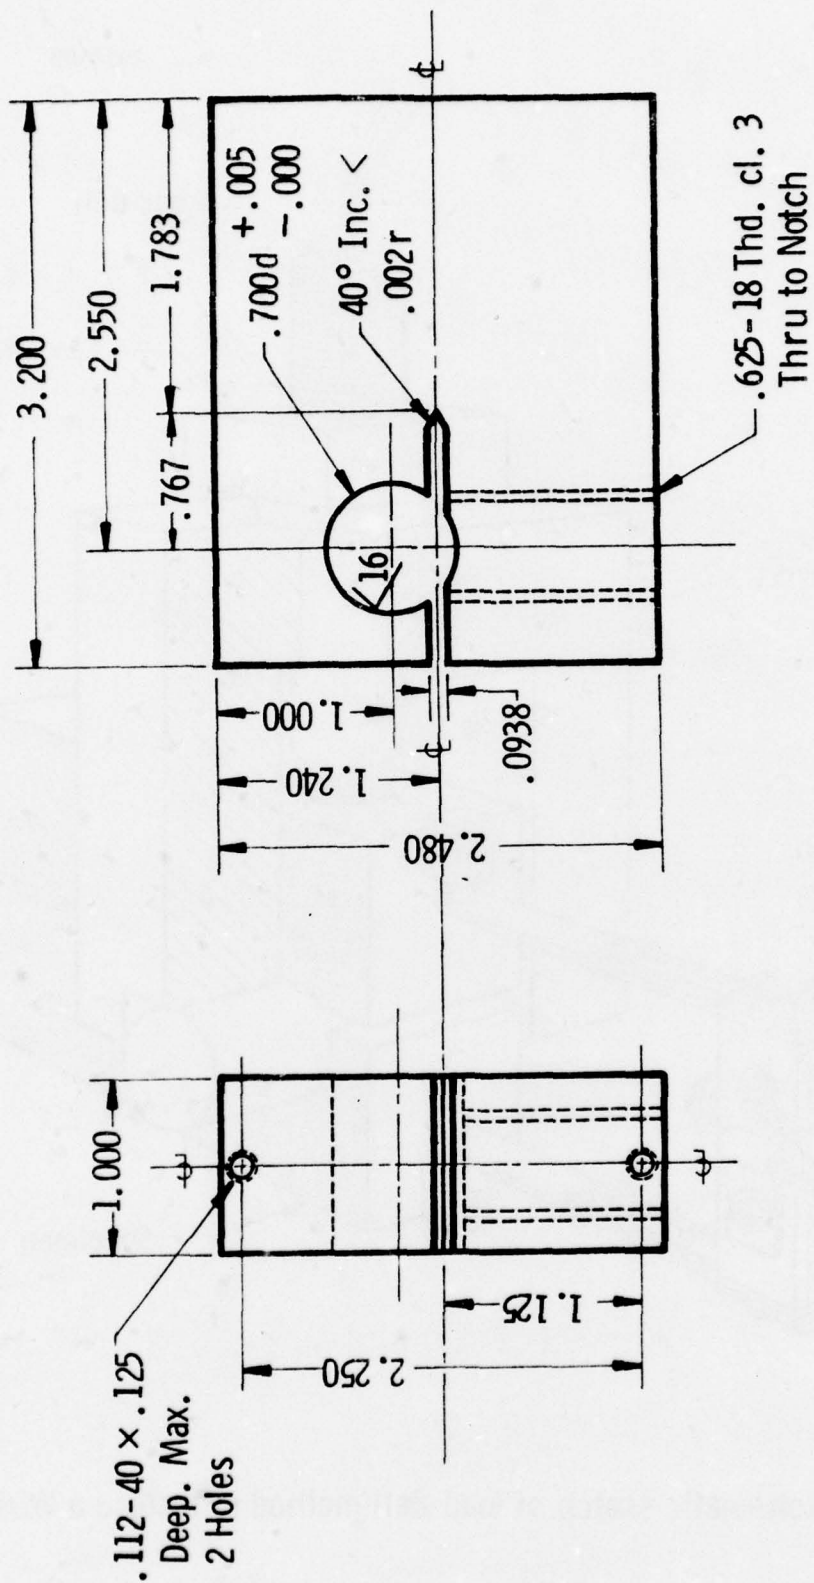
1T WOL specimen modified for bolt loading
